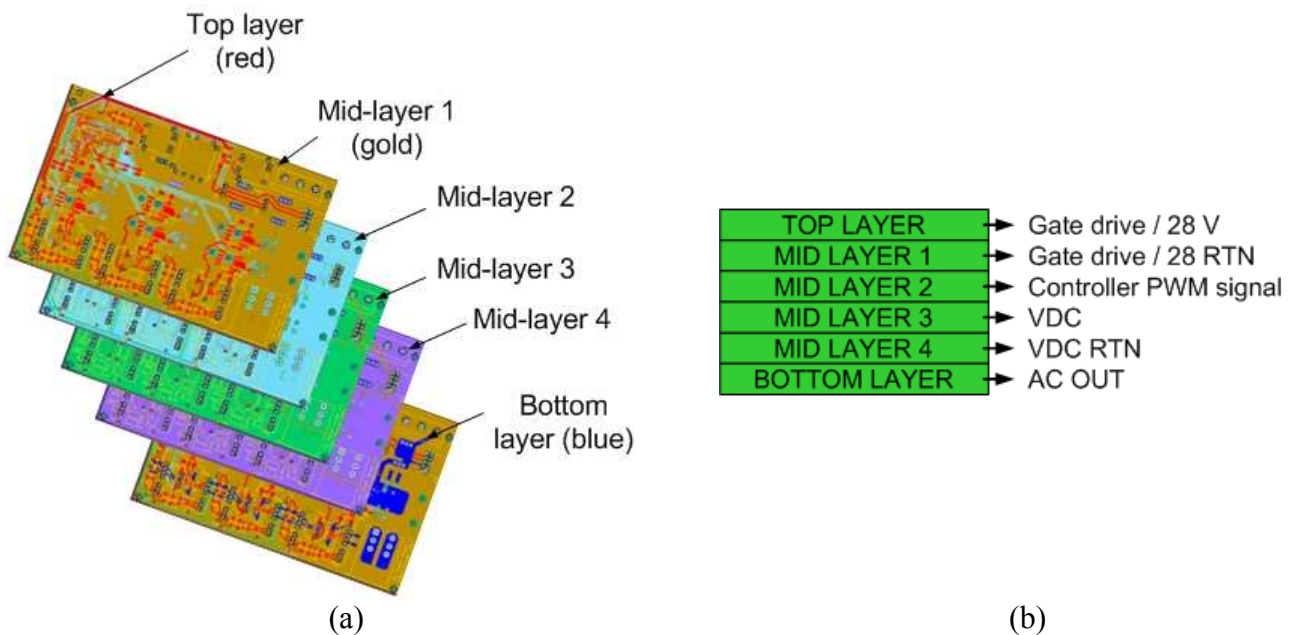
PCB stack-up. (a) Exploded view of the PCB layers and (b) function by layer
